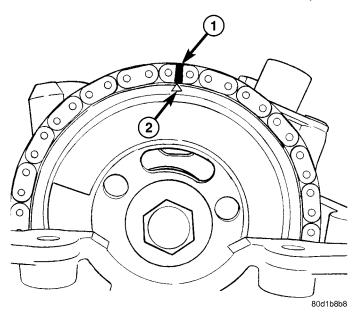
Identify Timing Chain Link for Reassembly Purposes
